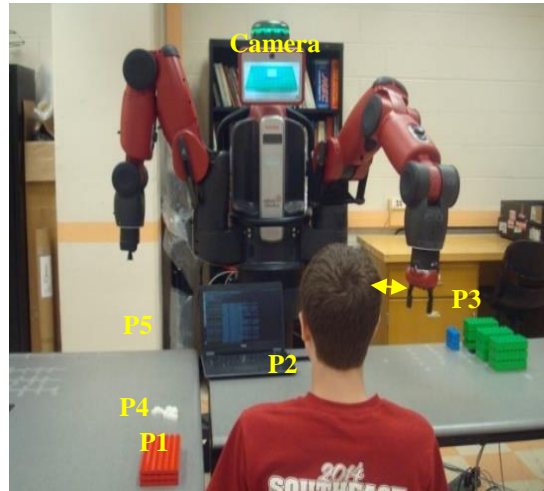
The human-robot hybrid cell for collaborative assembly of LEGO parts. Assembly parts required for three assembled products are seen. Assembly instructions are sequentially displayed in the robot’s face screen in real-time. Arrow shows the minimum gap between human body and robot arm to avoid collision.
